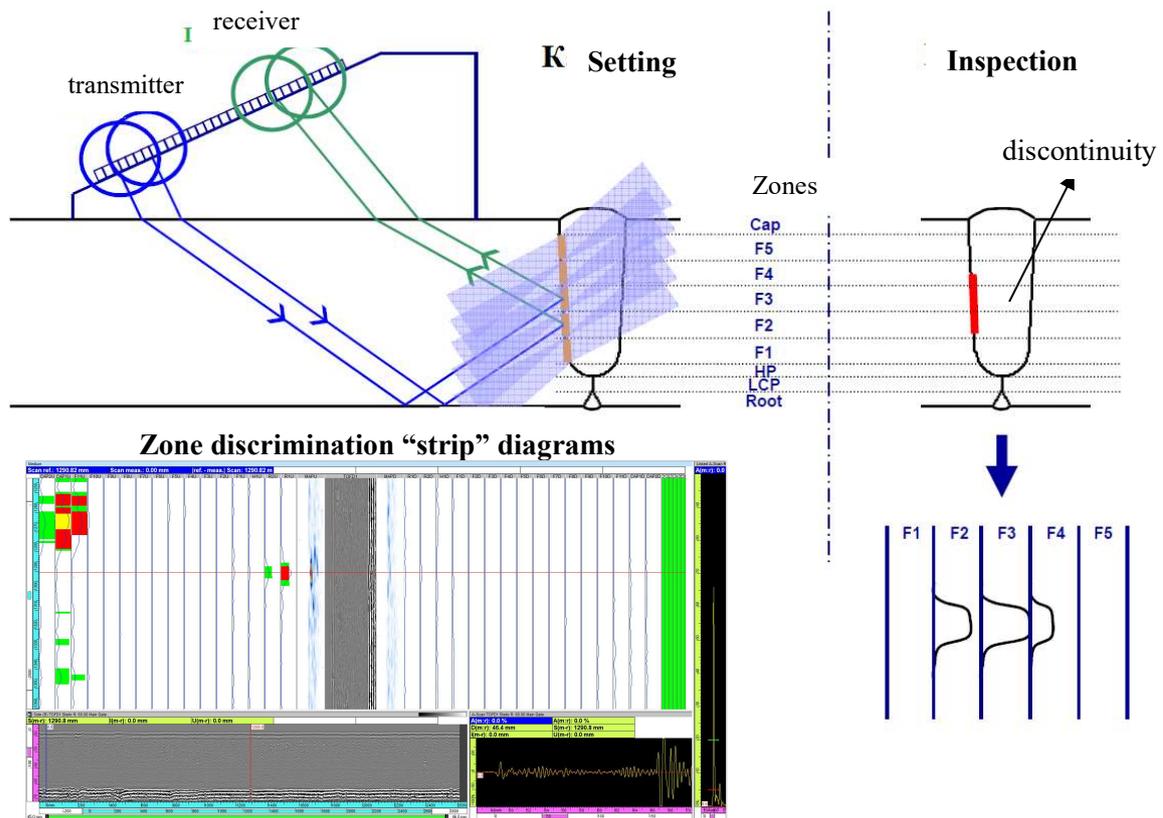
Scheme of inspection and „strip” charts of zone discrimination of weld.
